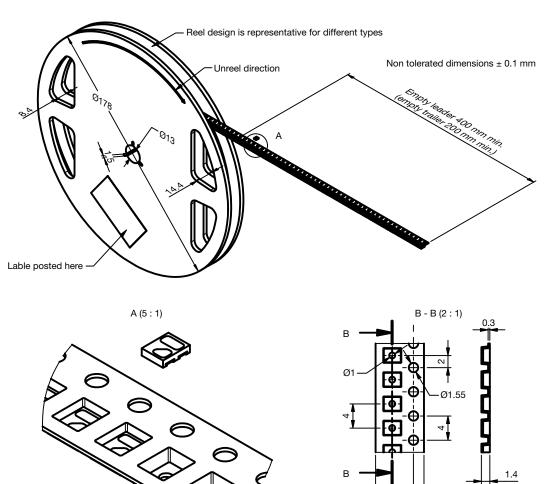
Issue: 2; 11.01.2022
